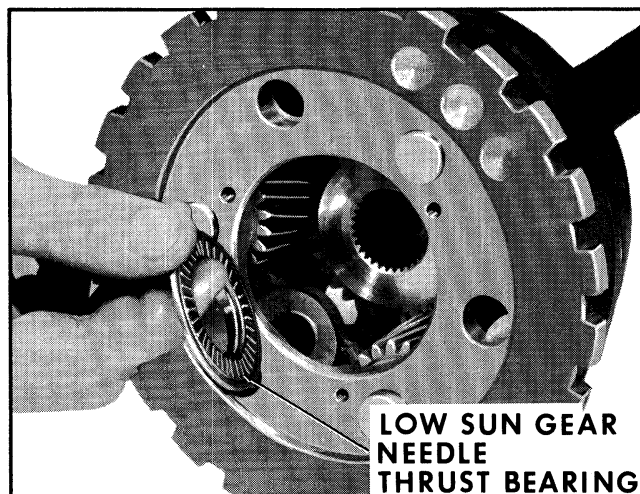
B-87 Removing Low Sun Gear Needle Thrust Bearing
